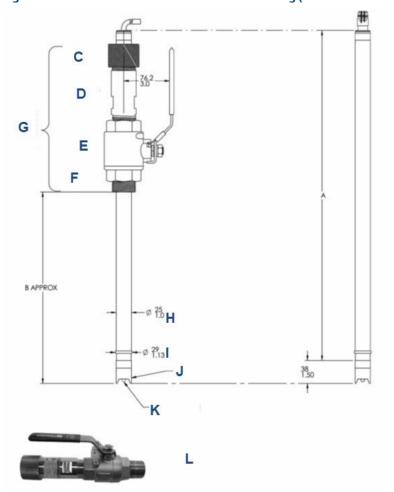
Rosemount 3400HTVP Dimensional Drawing (with and without 11/4-in. Ball Valve Assembly)
